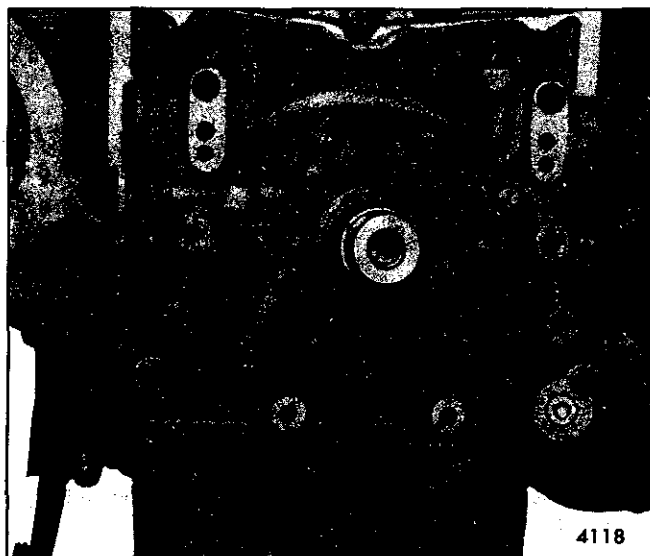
Engine Front Cover Mounting (Lower) —
